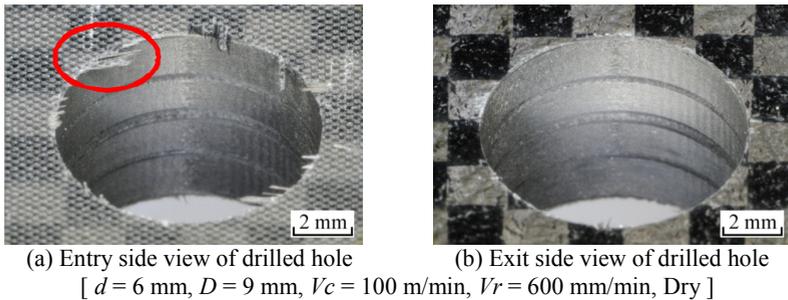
Drilled hole of 10th helical cutting process by using square end mill
